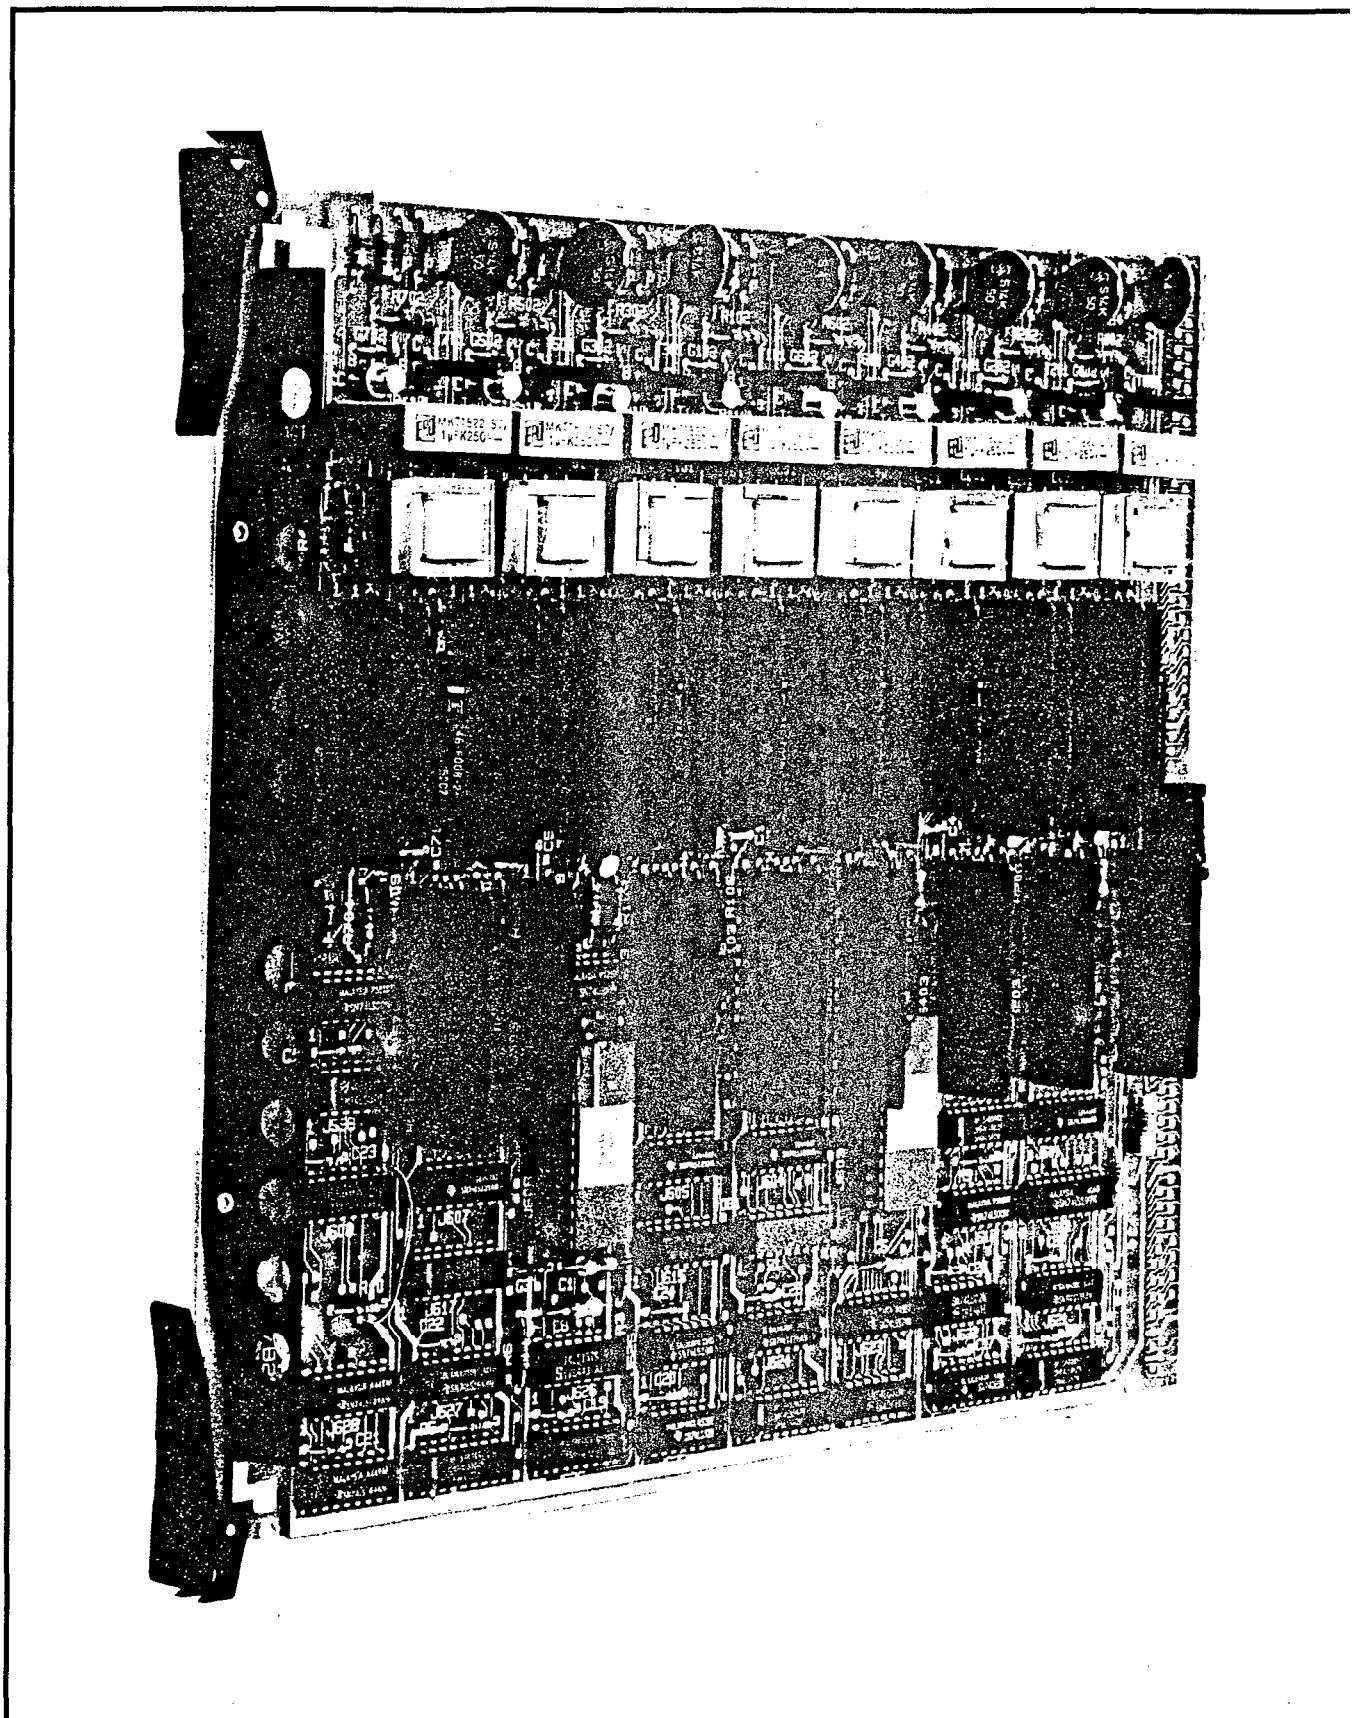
Subscriber Line Module Digital Printed Circuit Board
